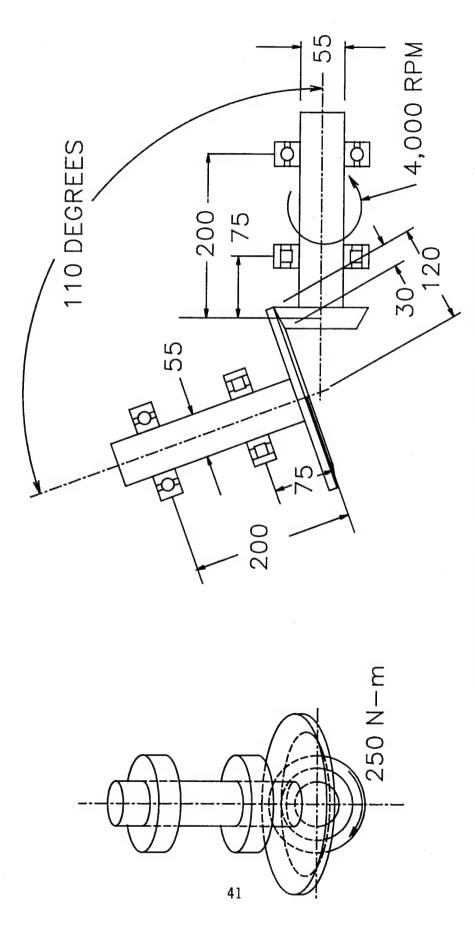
SPIRAL BEVEL EXAMPLE
